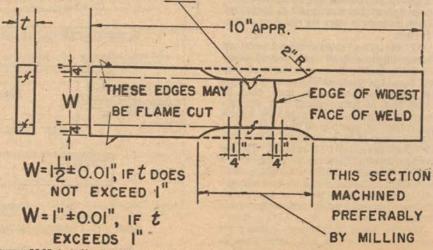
(n1)—Reduced-section test specimen required for tension test of welded joint,
